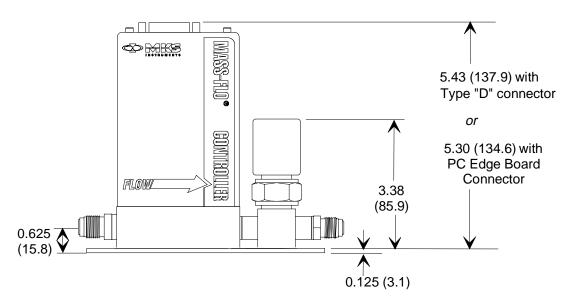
Outline Dimensions of the Type 2179 MFC (with optional mounting plate)
